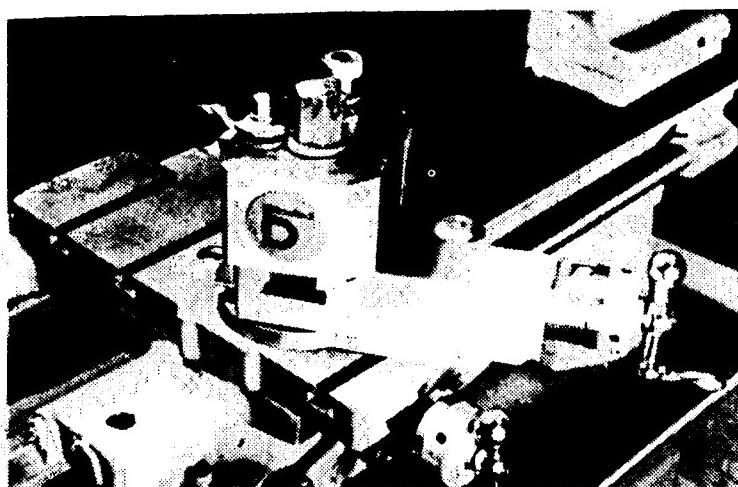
Compound Rest Set at 29° for Cutting 60° ISO Metric Thread
